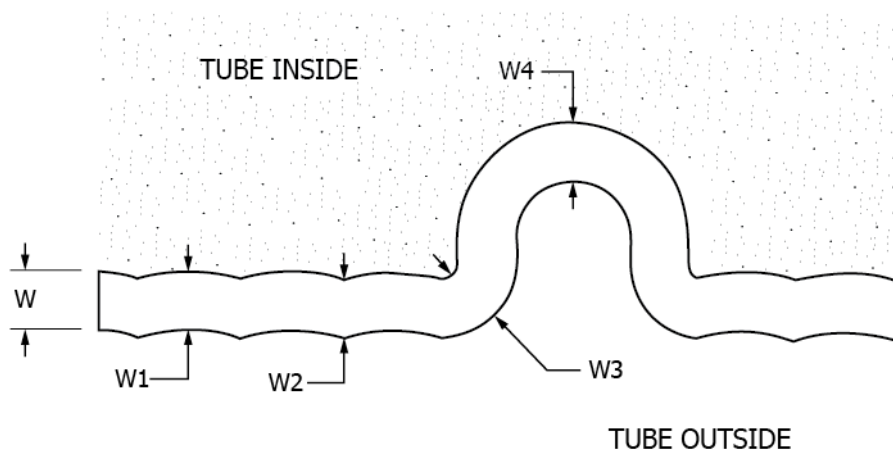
Details regarding Wall Thickness of Representative Sample Geometry of Patterns Used to Texture Flat Strip Material before it is Used to Create Welded Tube
